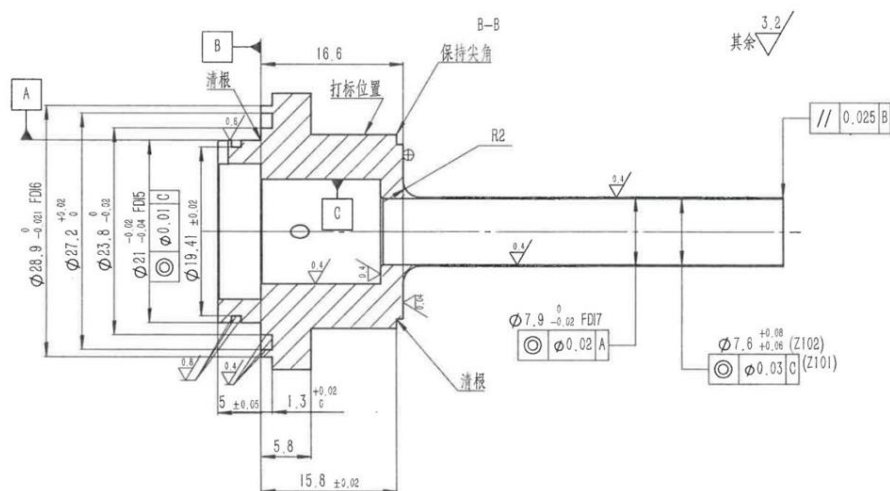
Dimensions of the Dewar Inner Tube Coupled with BSI-05 Cooler
